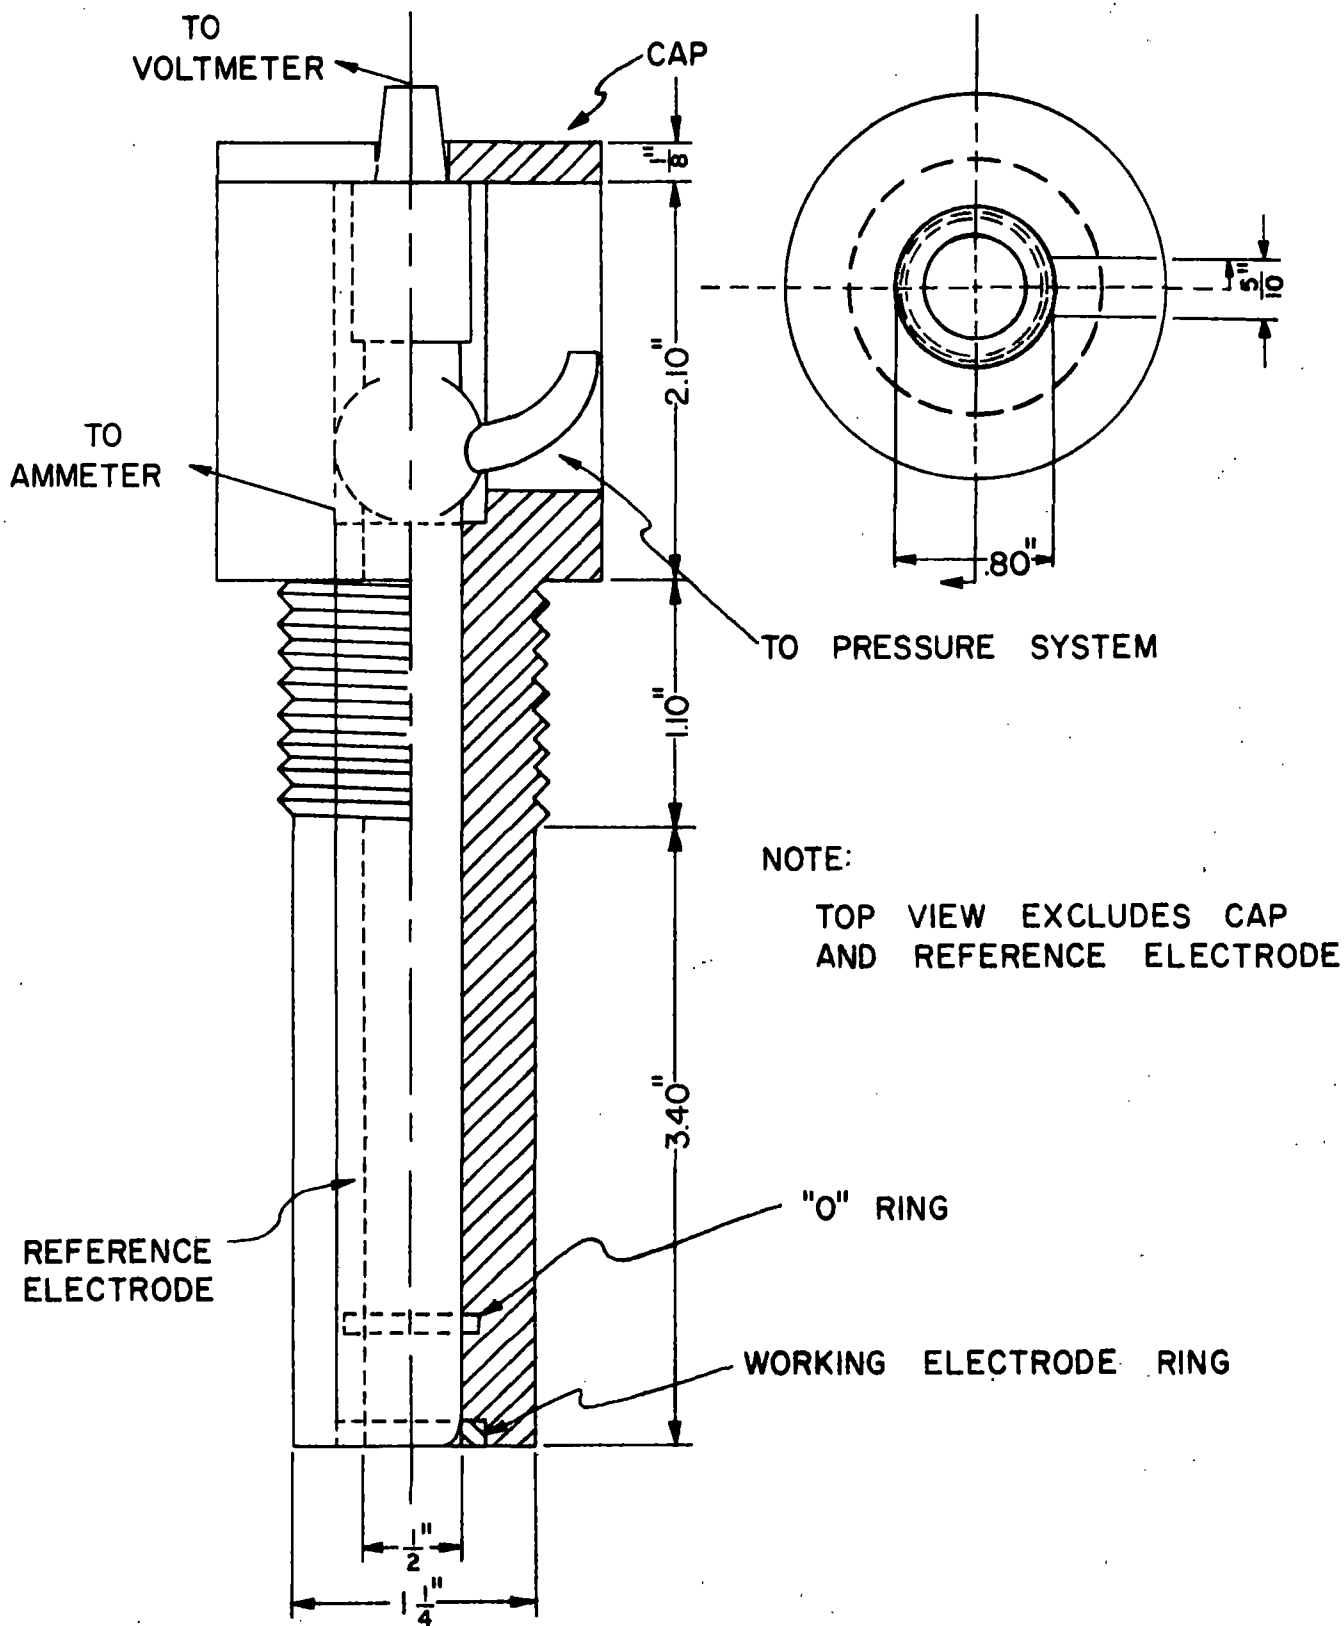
PIPELINE CORROSOMETER ELECTRODE ASSEMBLY.
